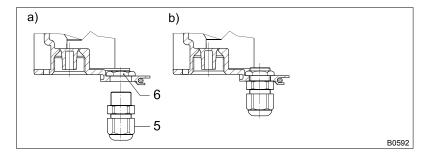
Threaded connectors for signal cable (M12 x 1.5)
